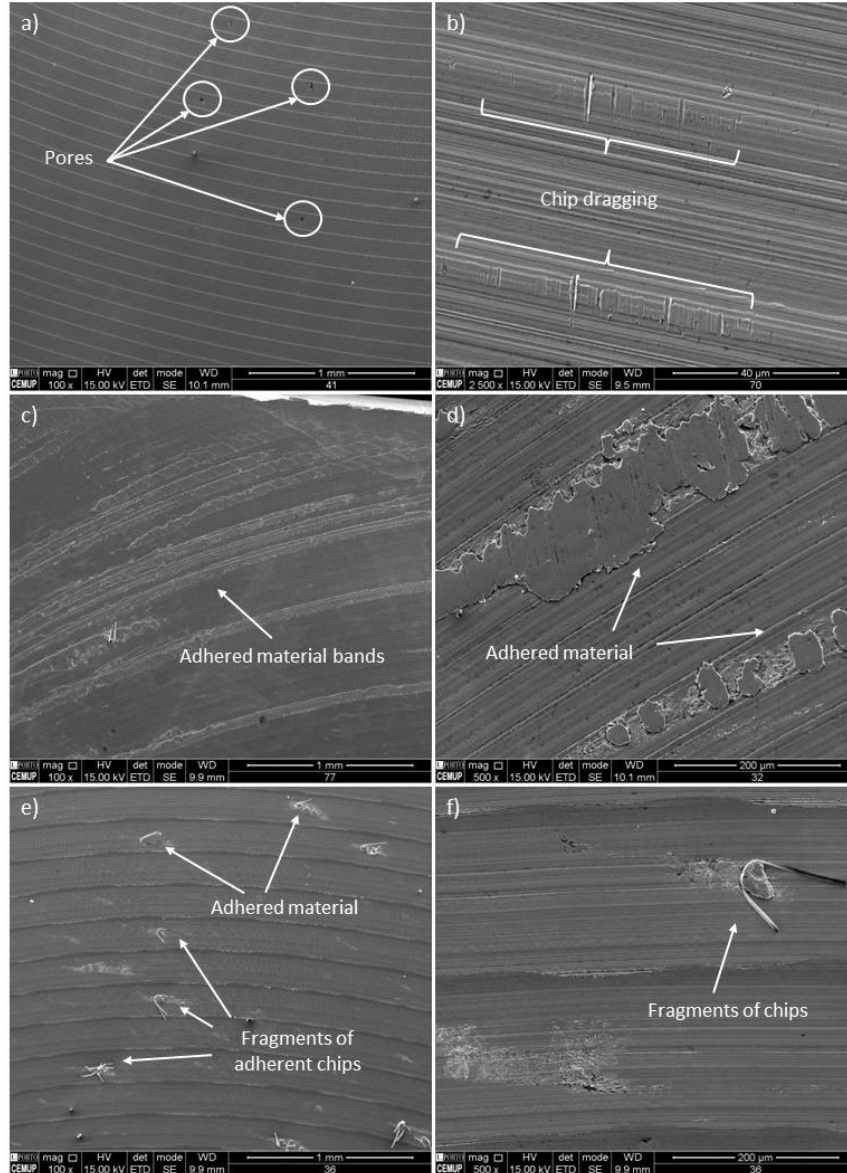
Defects of the machined surfaces: a) pores, b) chip dragging, c) and d) adhered material, e) and f) fragments of chips.
